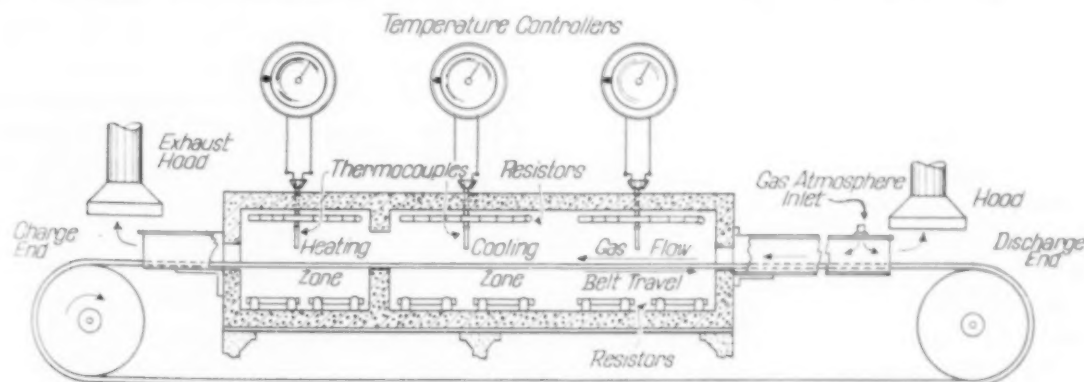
Schematic View of Modern Continuous Sintering Furnace
